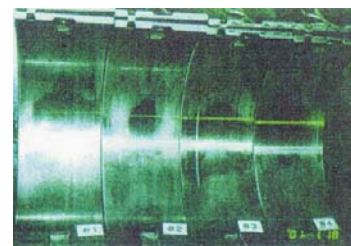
Main Bearing with LO Control using the Kidney System and the Others
